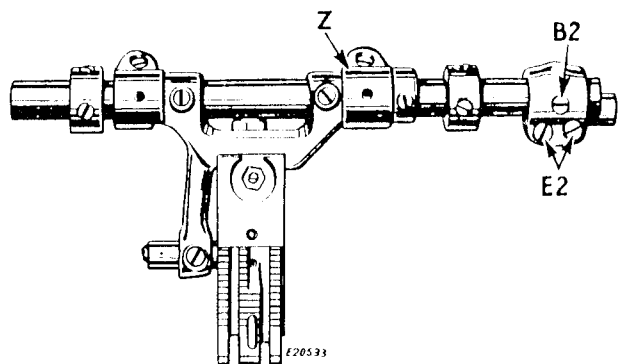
Feed Driving Rock Shaft Crank and Feed Rocker Assembly
